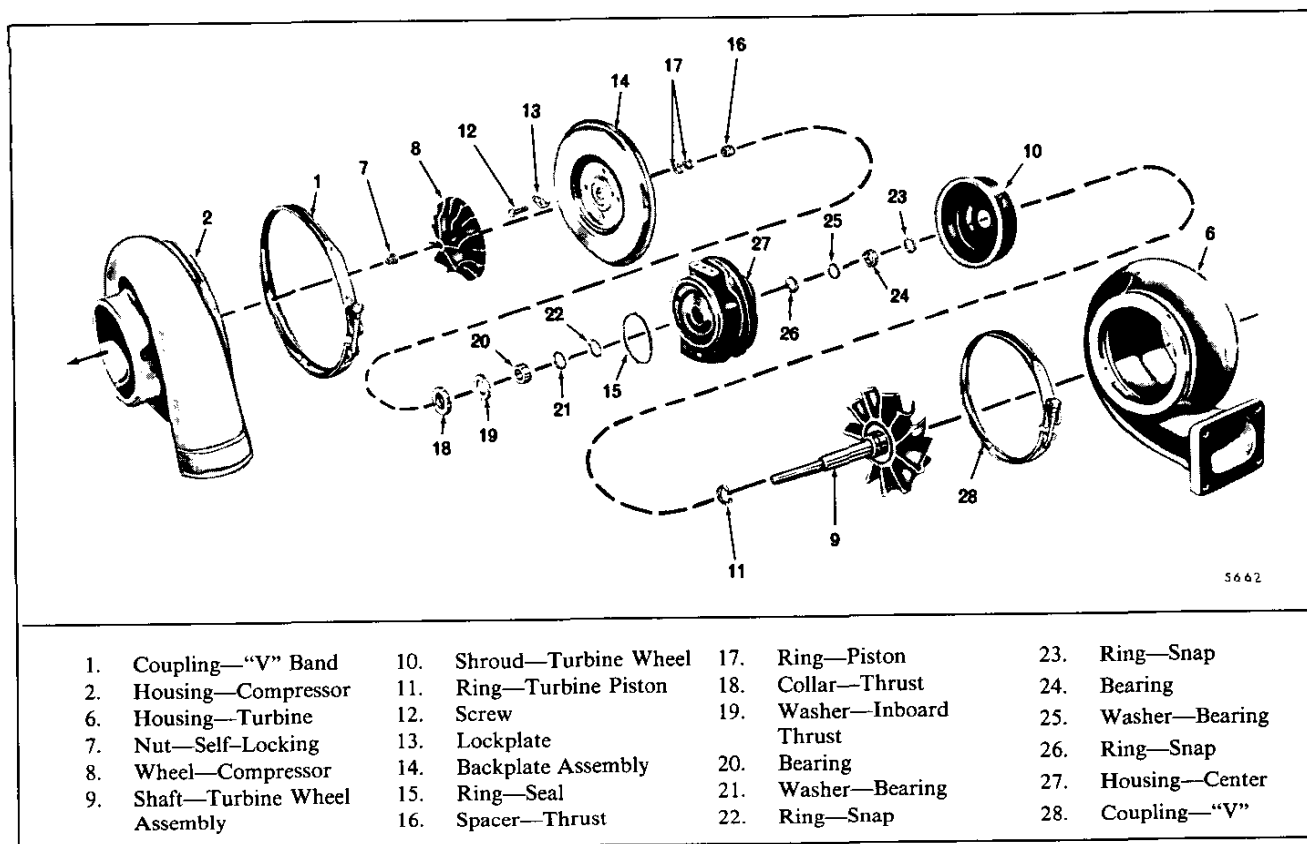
TV7301 and TV8101 Turbocharger Details and Relative Location of Parts
